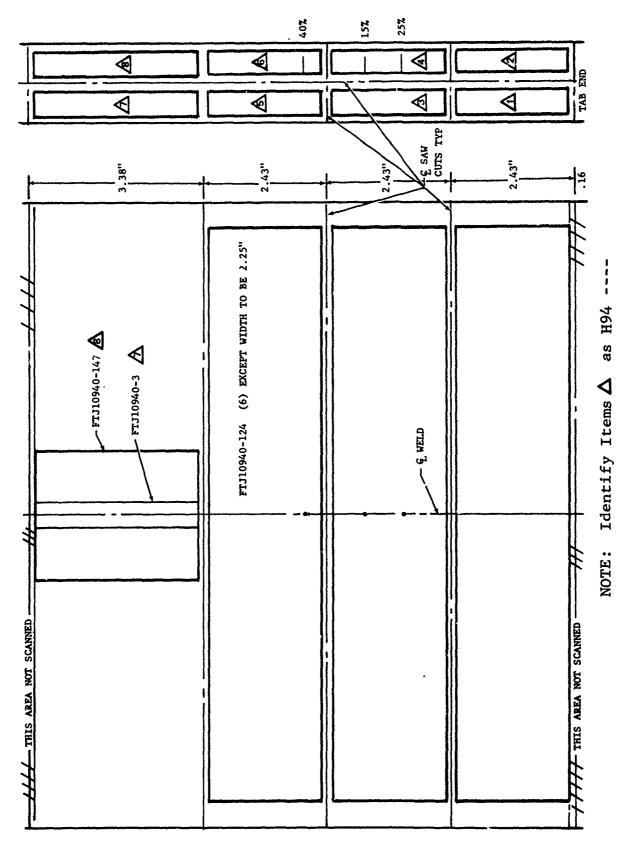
MATERIAL ALLOCATED FOR H94 PLATE ELECTRON BEAM WELD
